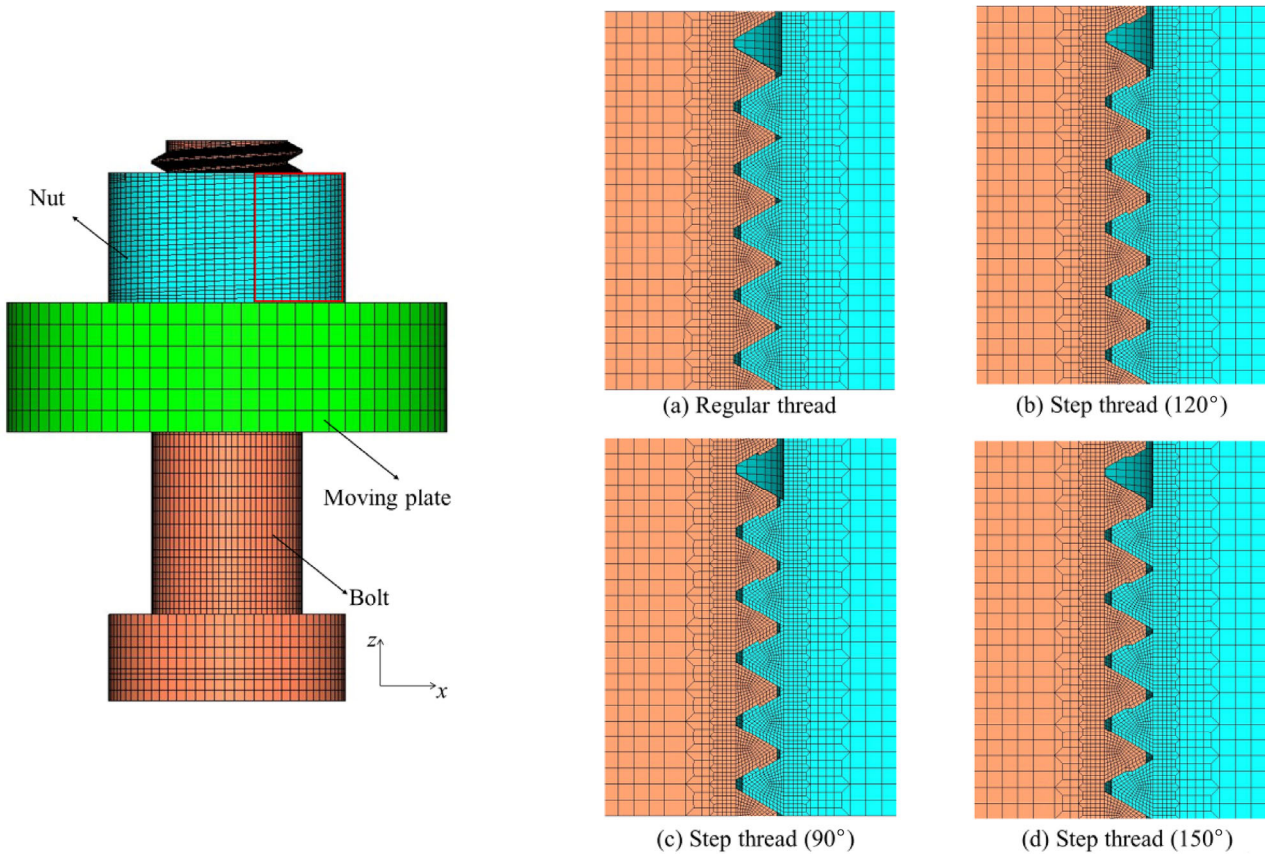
FEMs of bolted joints with step threads and normal threads.
